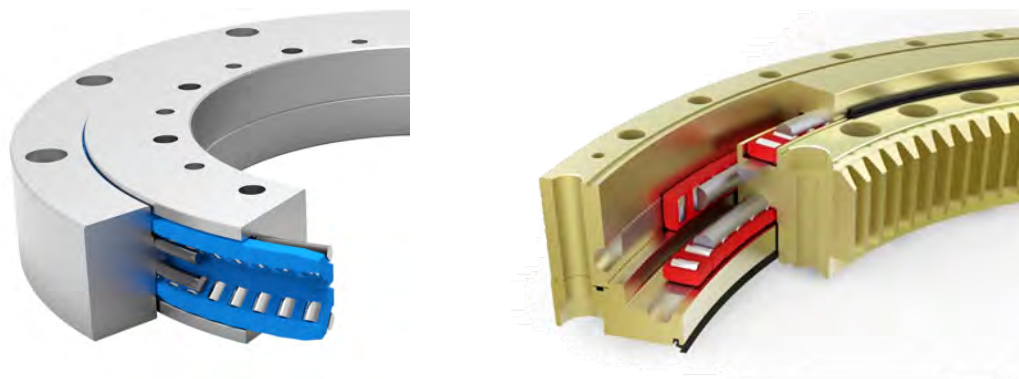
Double-row angular wire race contact roller slewing bearing [41] and triple-row wire race roller slewing bearing.
